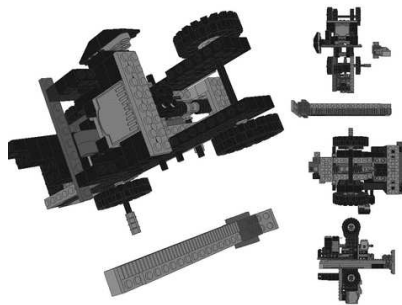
LEGO CAD of robot arm for picking up the code elements
